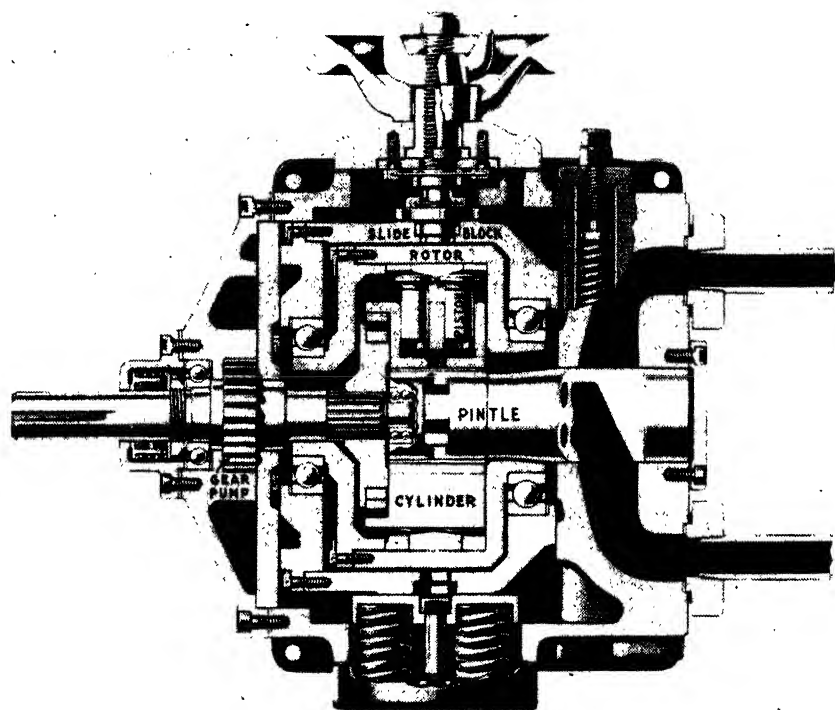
Radial-piston variable-stroke pump. (Courtesy of The Oilgear Company.)
